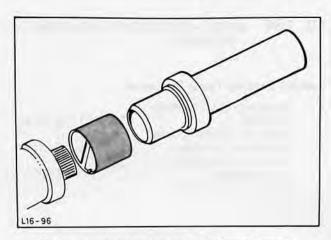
Fit extension housing bush with Special Tool No. 16-015/16-016
